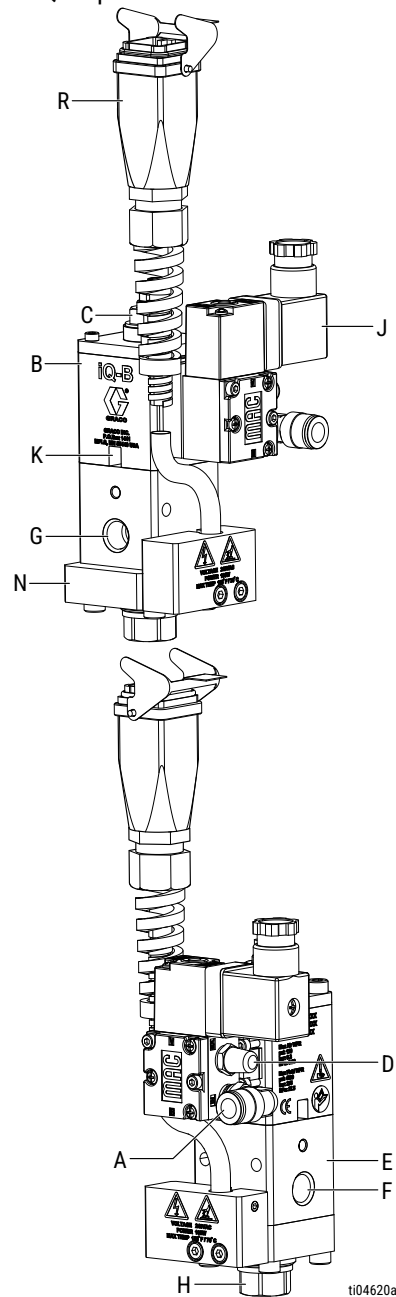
Ball Seat, Heated Valve Mounted Solenoid 2011765 Valves
